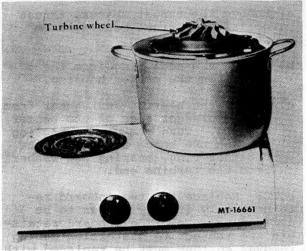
Heating V-800 Turbocharger Compressor Wheel
